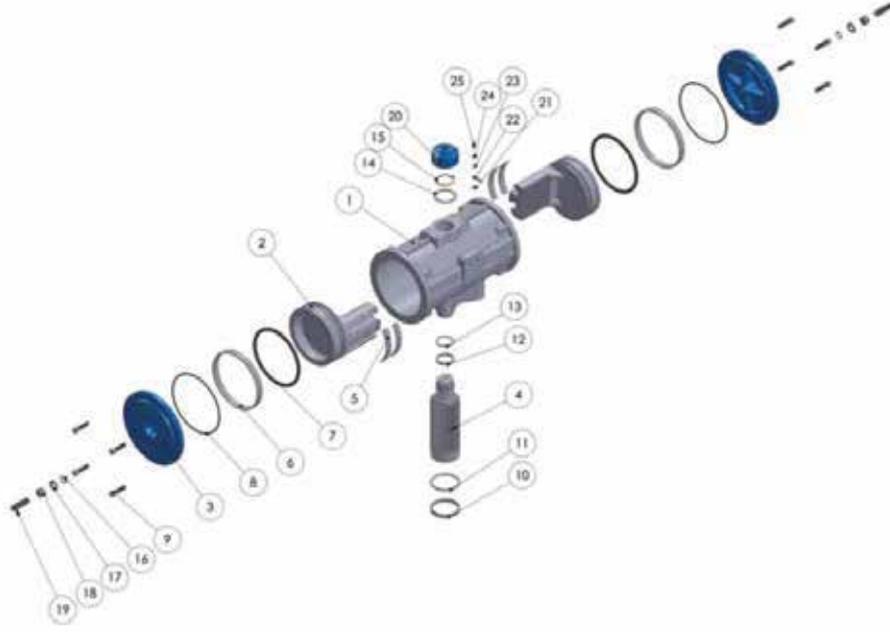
Exploded drawing of Spring Return Actuators (RA/RX/RAM/RXM 143-160-200-270-350 SR)
